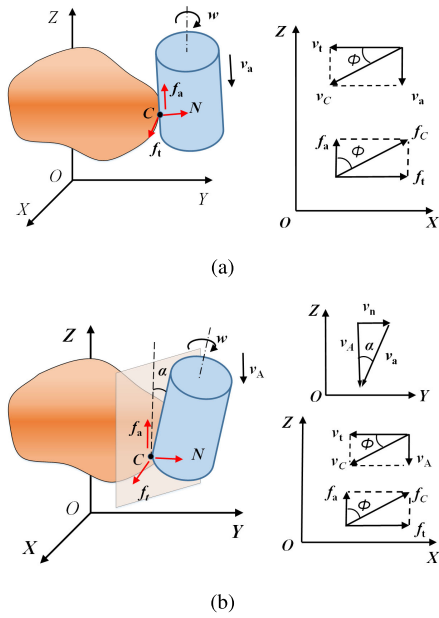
Point contact of cylinder and geometry: (a) contact at side surface of cylinder, (b) contact at the edge of side surface of cylinder.
